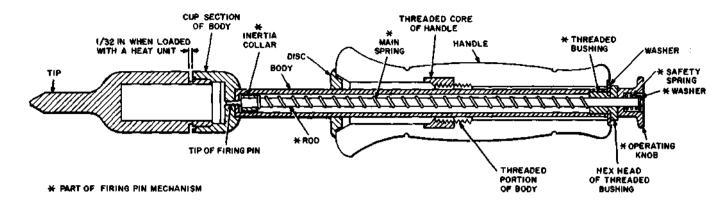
Section View of KS-14582 L1 Soldering Copper with L5 Tip
